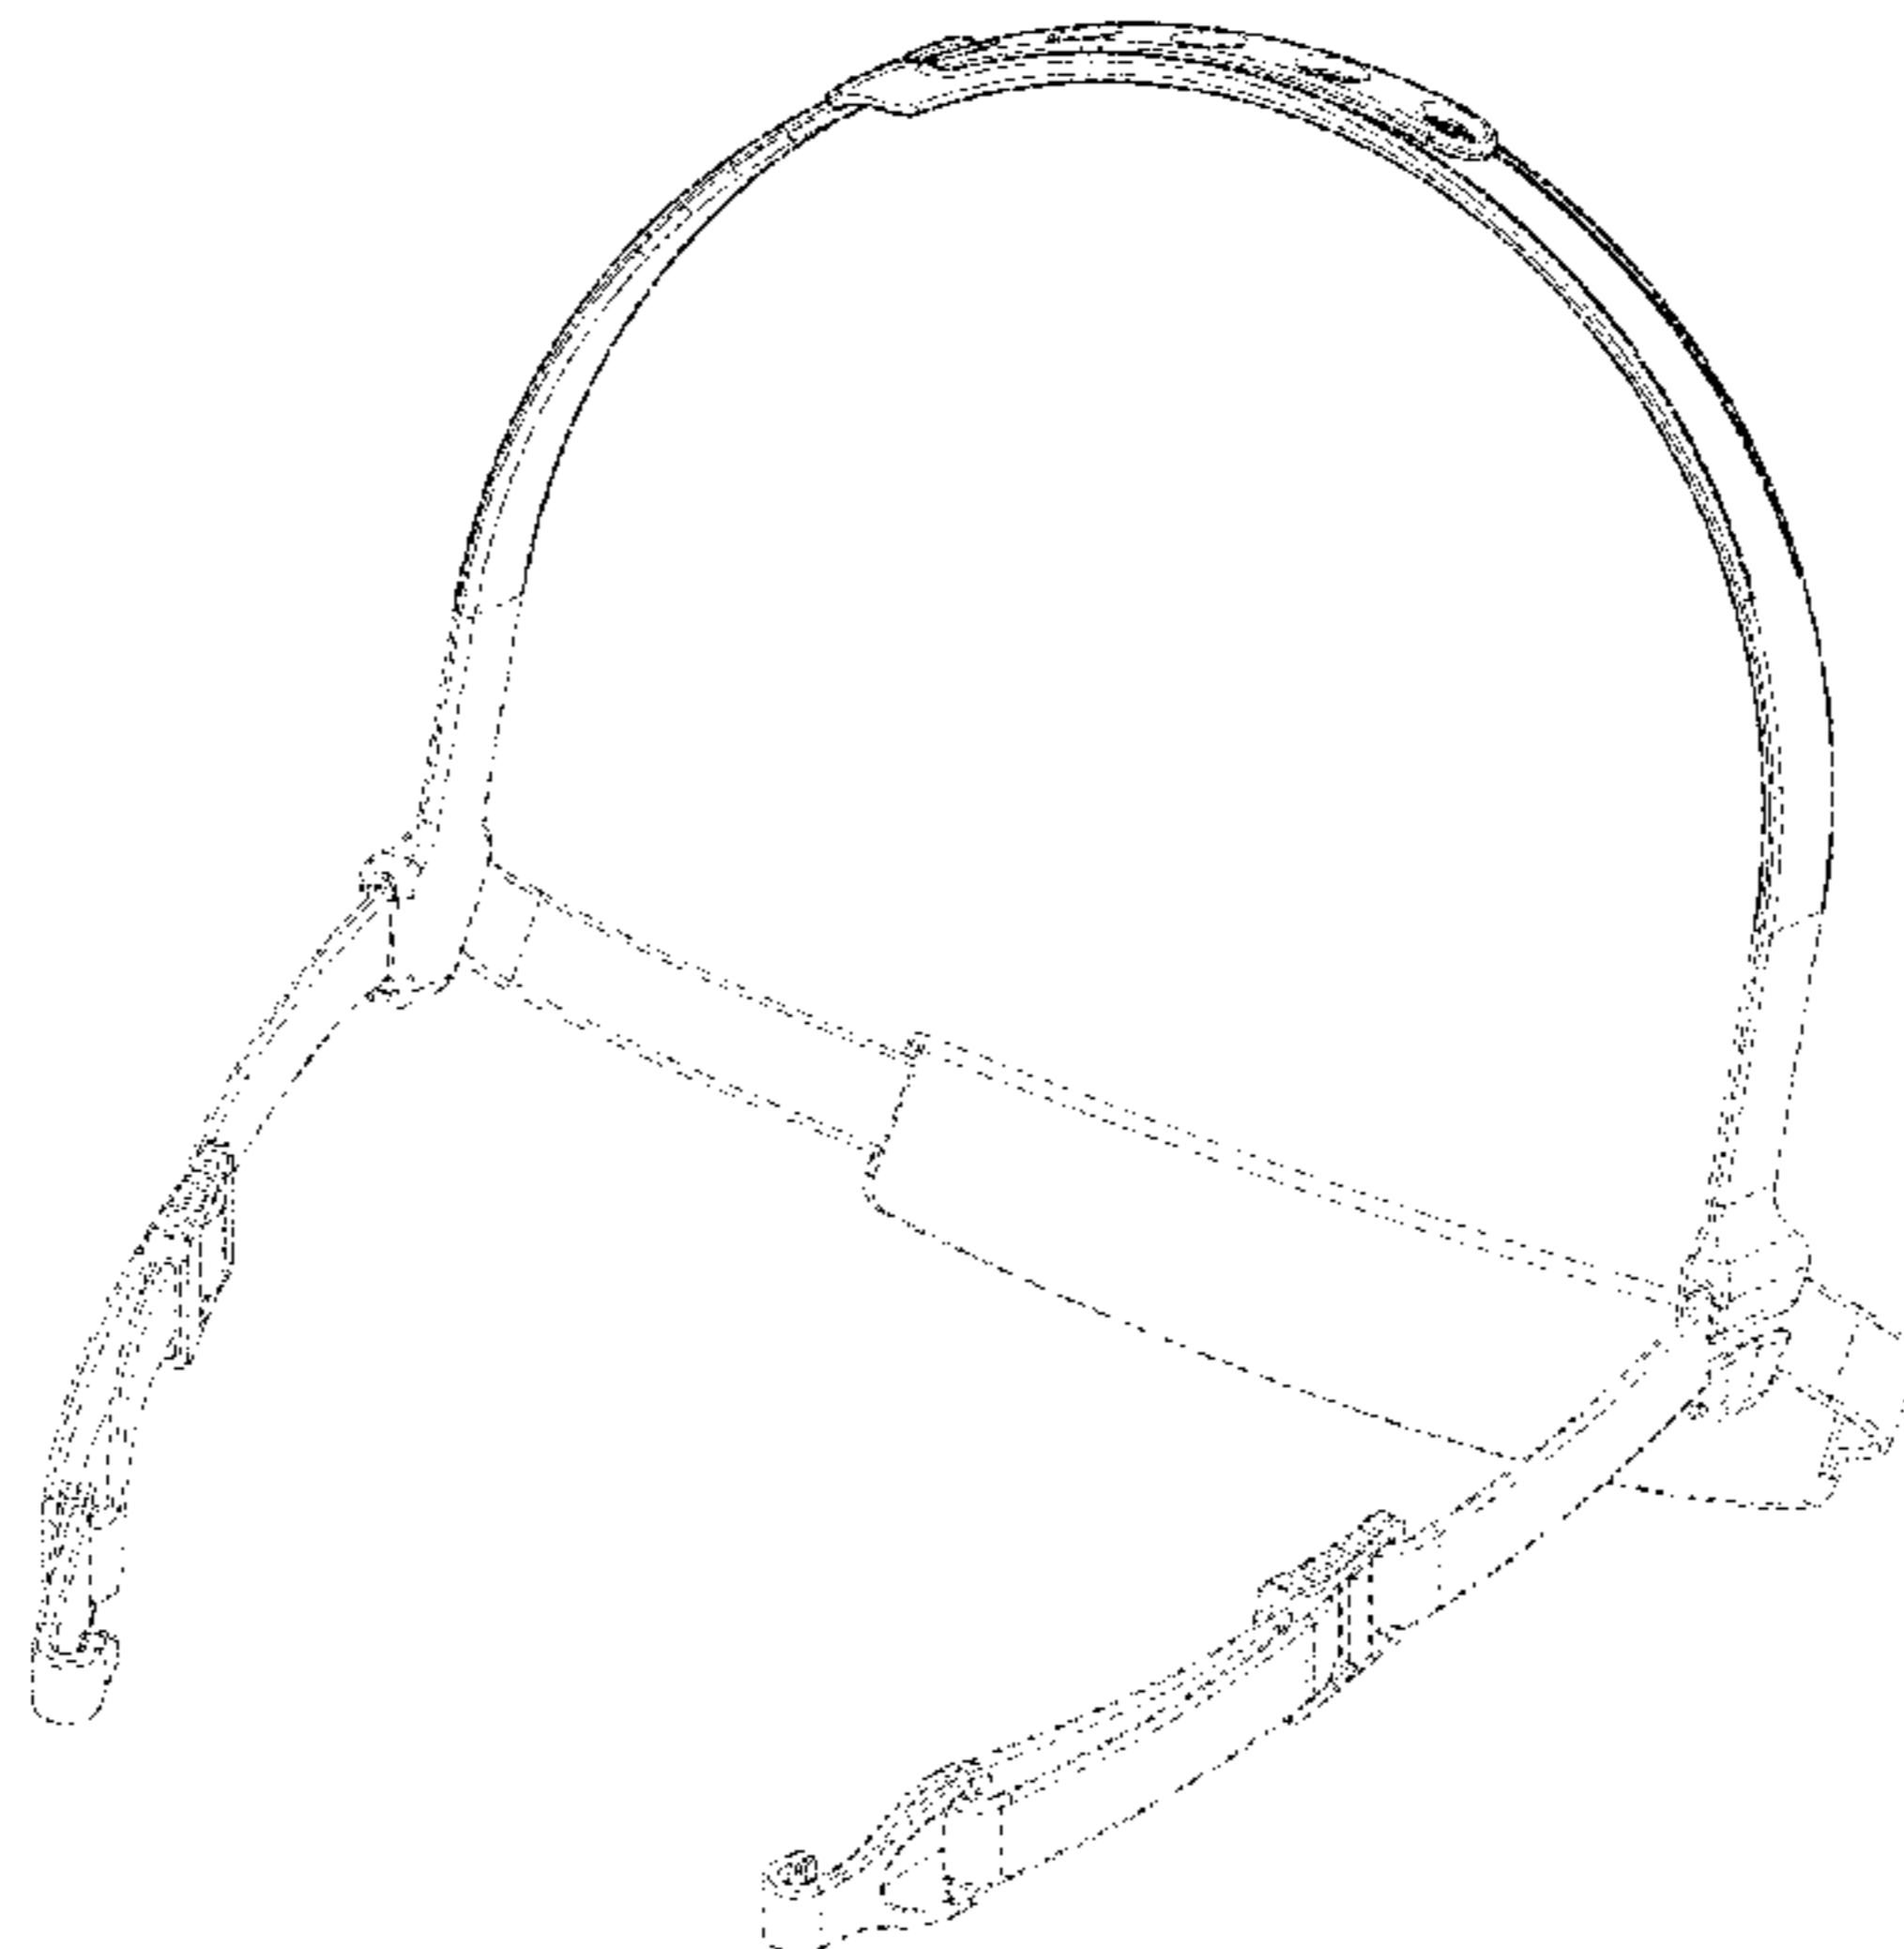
is a top view of the headgear assembly for breathing interface of FIG. 1.
